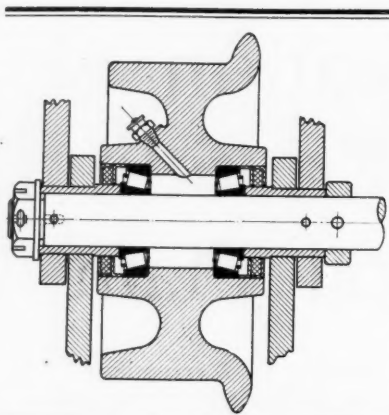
Bearing Mounting for Pan Conveyor Wheel
